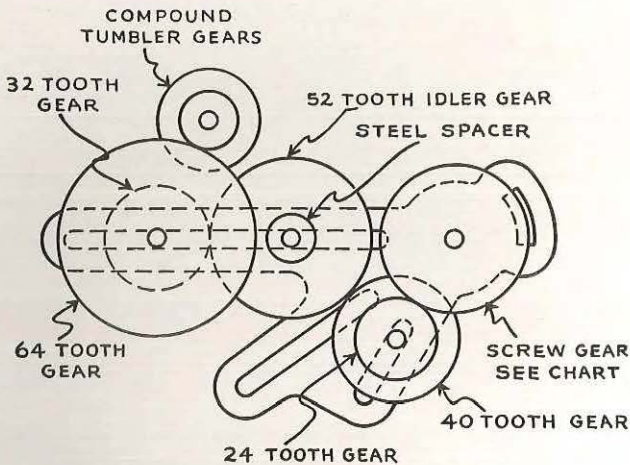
Gear set-up for 80 and 96 threads per inch.
